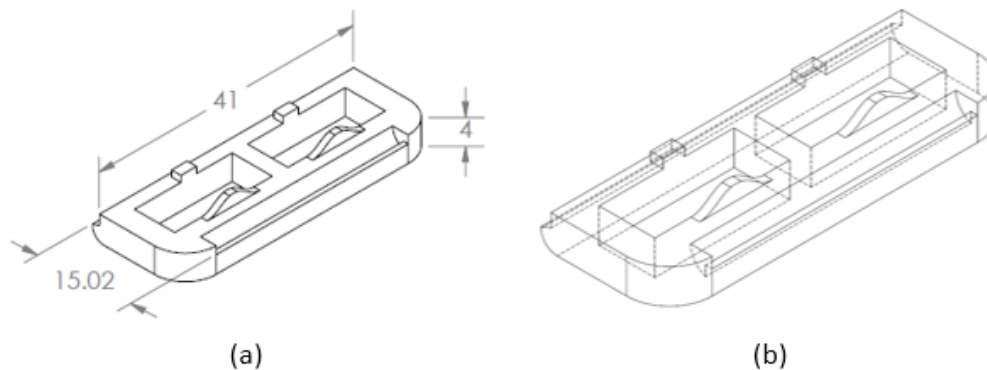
Isometric View of the Simplified Part used for analysis: (a) Isometric view with dimensions, measured in millimeters; (b) Isometric view with hidden lines.
